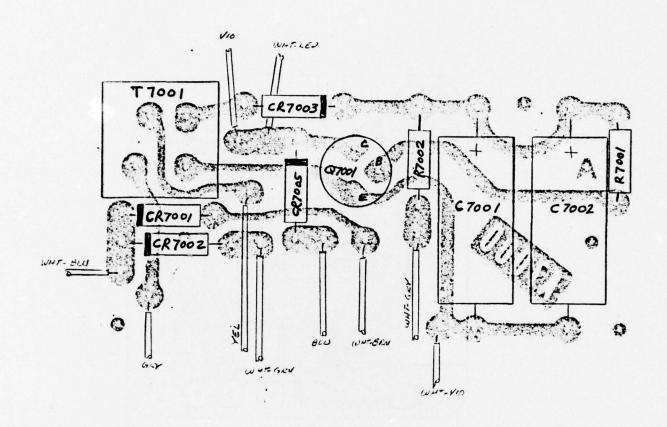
P.C. BOARD LAYOUT FOR THE A7000A NULL SWITCH ASSEMBLY
